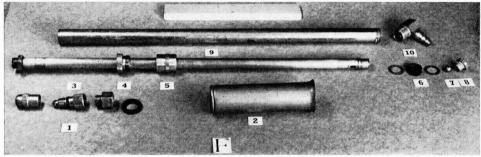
Unit "F" hand pump. (1) Adjustable stream nozzle assembly, (2) Hollow handgrip, (3) Plunger, (4) Packing nut. (5) Packing gland containing leather washers, (6) Leather washers bounded by brass washers, (7) Outlet valve ball, note ball-retaining tabs as bent-in sections of plunger wall, (8) Outlet valve body, (9) Cylinder, (10) Inlet valve assembly and hose nipple.
